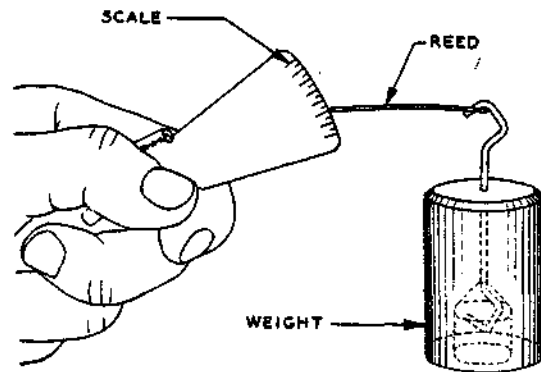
Method of Checking Accuracy of No. 62B Gauge
